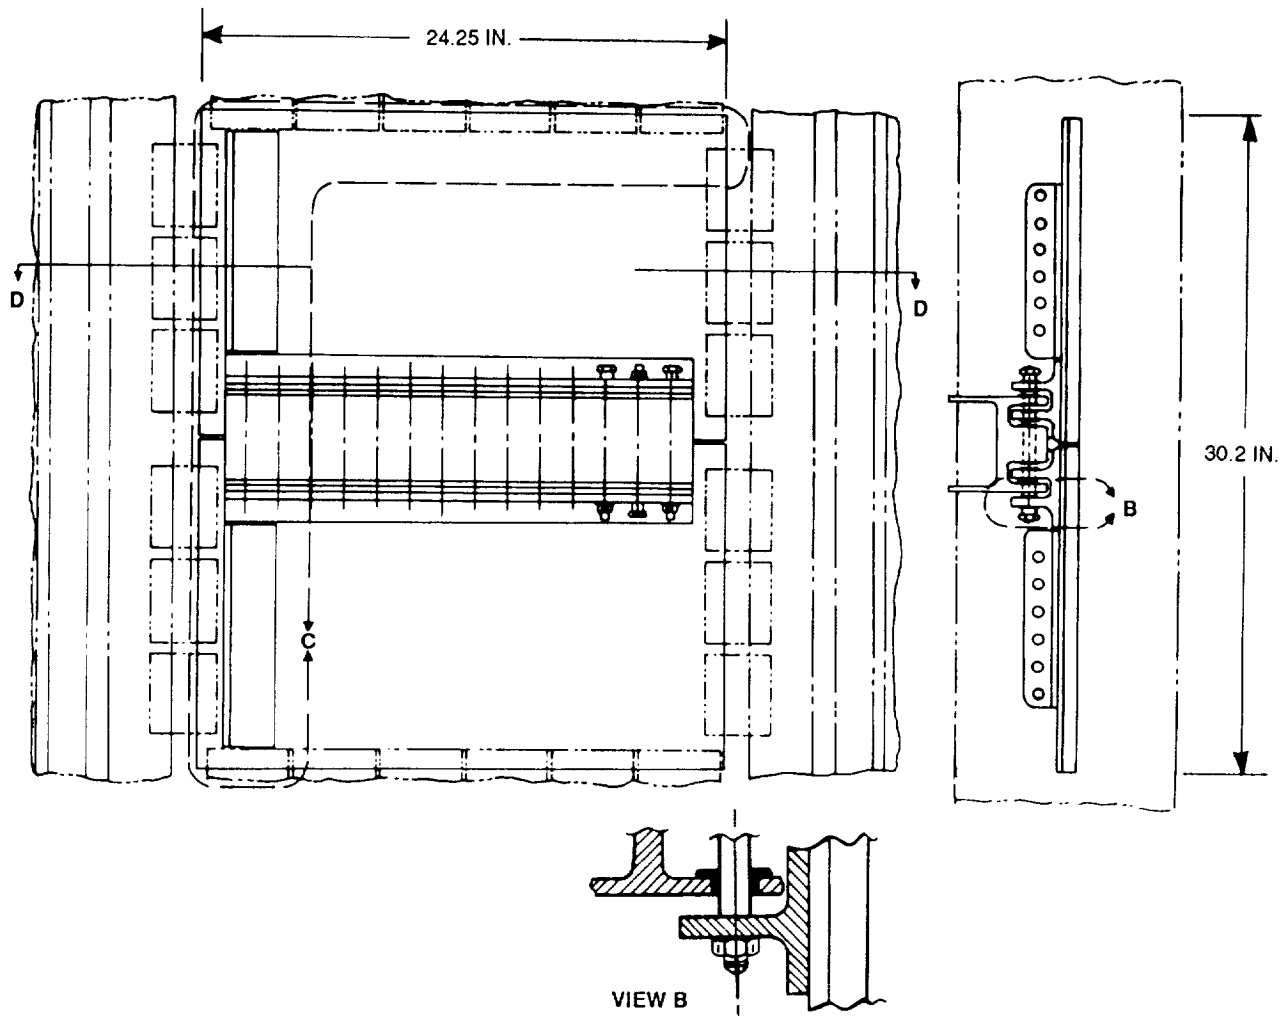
SLIDE-JOINT COMPRESSION PANEL TEST SETUP
